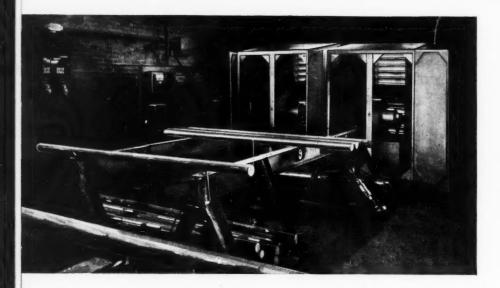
Grinding Room in Inspection Department of a Steel Mill, which is Equipped with High-cycle Electric Portable Tools
